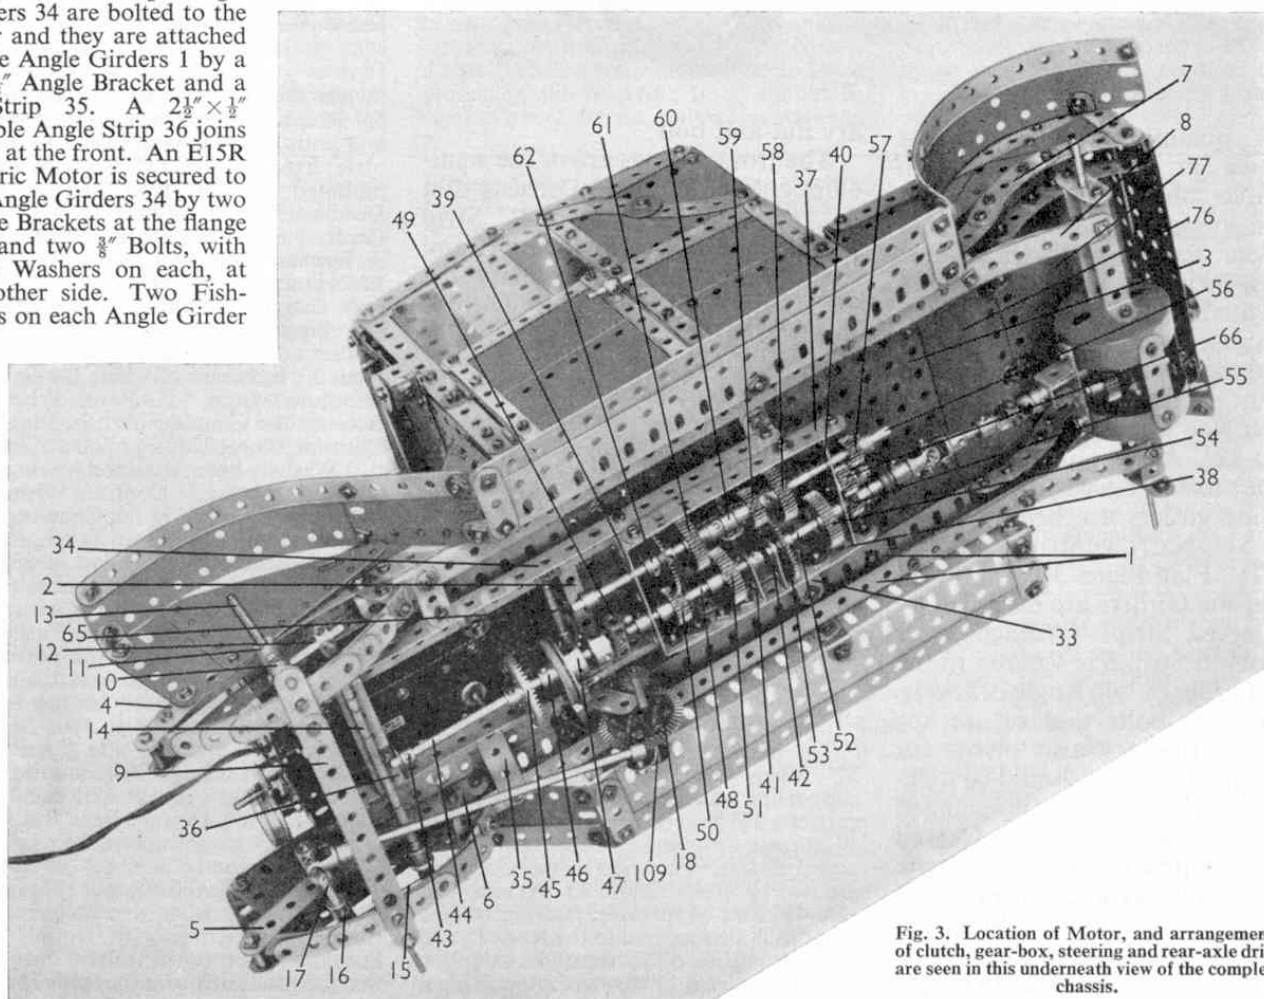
Location of Motor, and arrangements of clutch, gear-box, steering and rear-axle drive are seen in this underneath view of the complete chassis.
